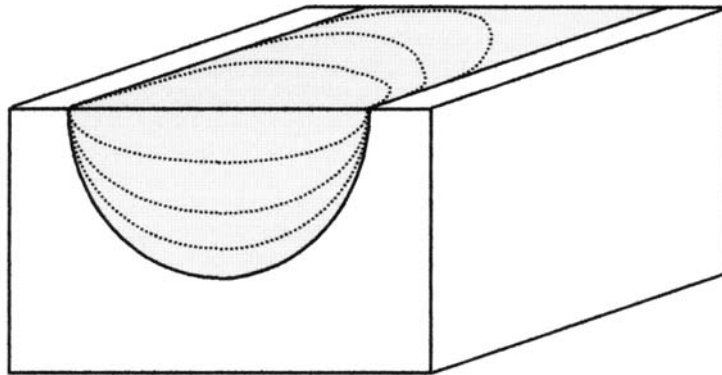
Transverse cross-section and top view of weld showing a form of macrosegregation known as banding.
